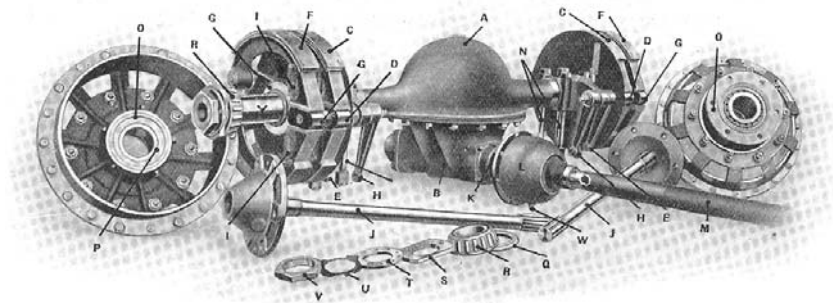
Hubs, Rear Brakes, Live Axles, Wheel Bearings, and Propeller Shaft Drive.
